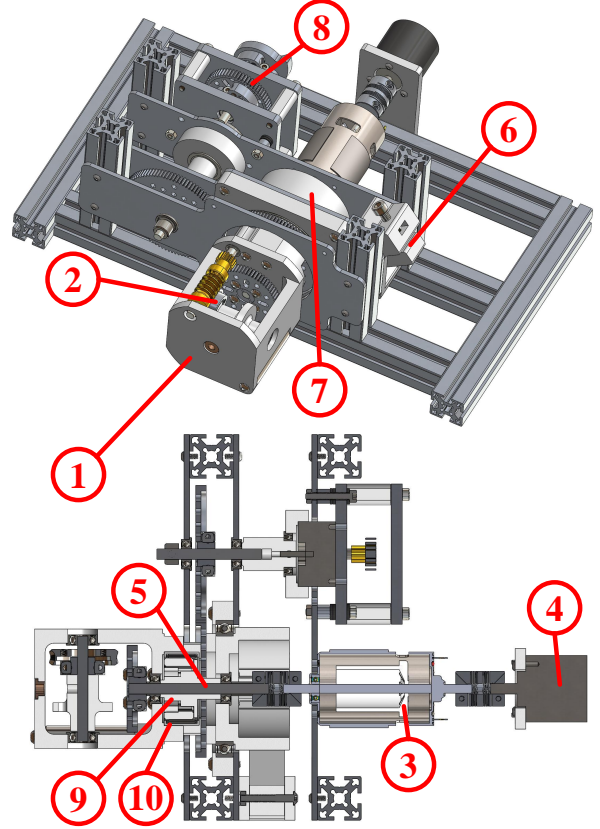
The TSA/winch hybrid actuator. The turret (1) houses the worm gear assembly and winch (2). The actuator is driven by a brushed motor (3) with an encoder (4) via a through-hole drive shaft (5). Rotational friction can be adjusted via the cantilever beam contact (6) pressed against the turret ring (7). After the winching phase, the subsequent twisting rotations are mechanically recorded by a high-reduction gearbox (8). During the reverse direction (untwisting), a dial on this gearbox hits a mechanical stop, after which an integrated slip clutch (9) and unidirectional bearing (10) enable the system to fully unwind to its original state.
